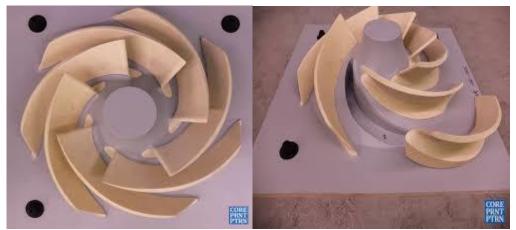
Primary pattern of impeller produced by RP machine (Ponche et al.,
